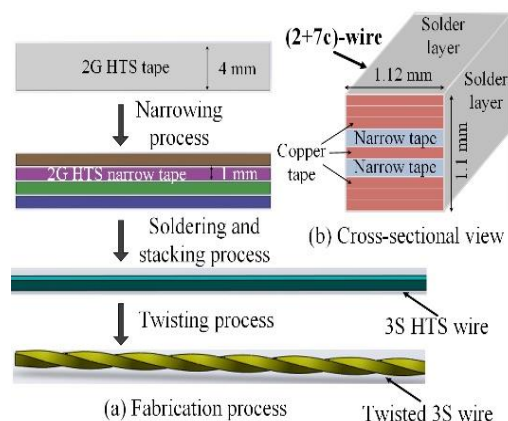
(a) Fabrication process and (b) cross-sectional view of twisted soldered-stacked-square (3S) HTS wire.
